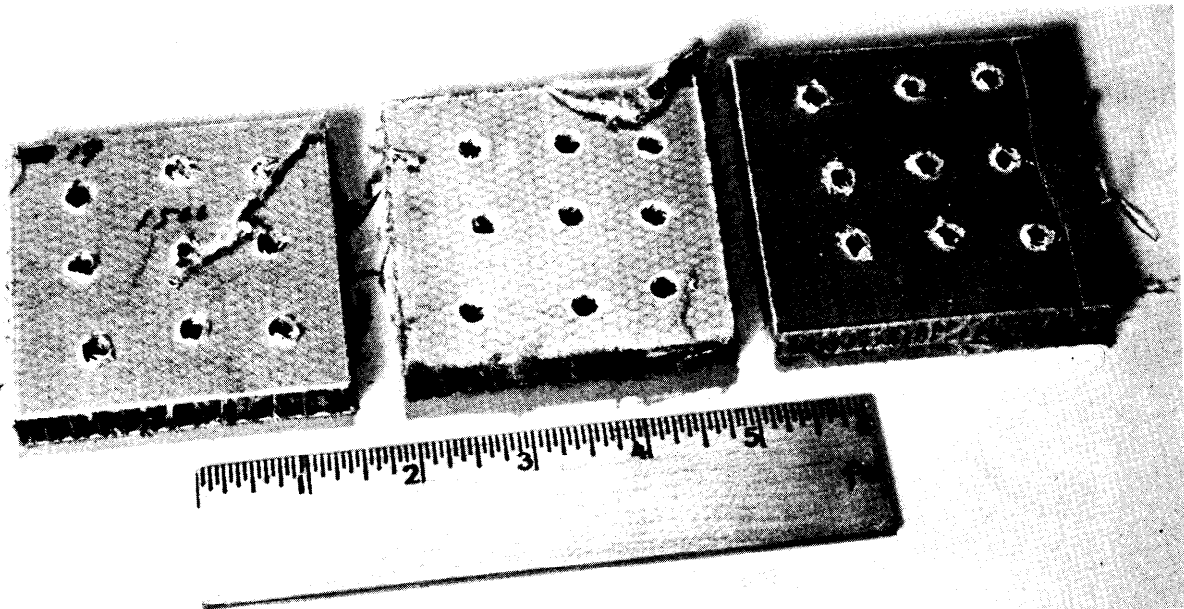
THESE SAMPLES SAME AS PHOTO NO. 5 EXCEPT
